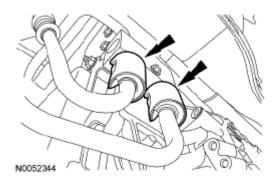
Locating Secondary Latches Courtesy of FORD MOTOR CO.
